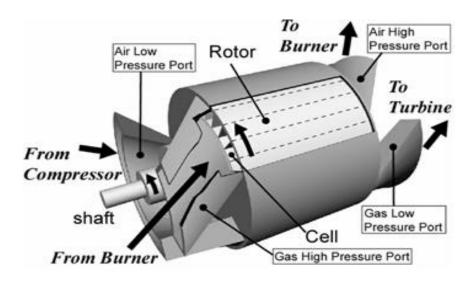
Schematic example of the physical implementation of a wave rotor in a gas turbine exploded view, piping not shown...
